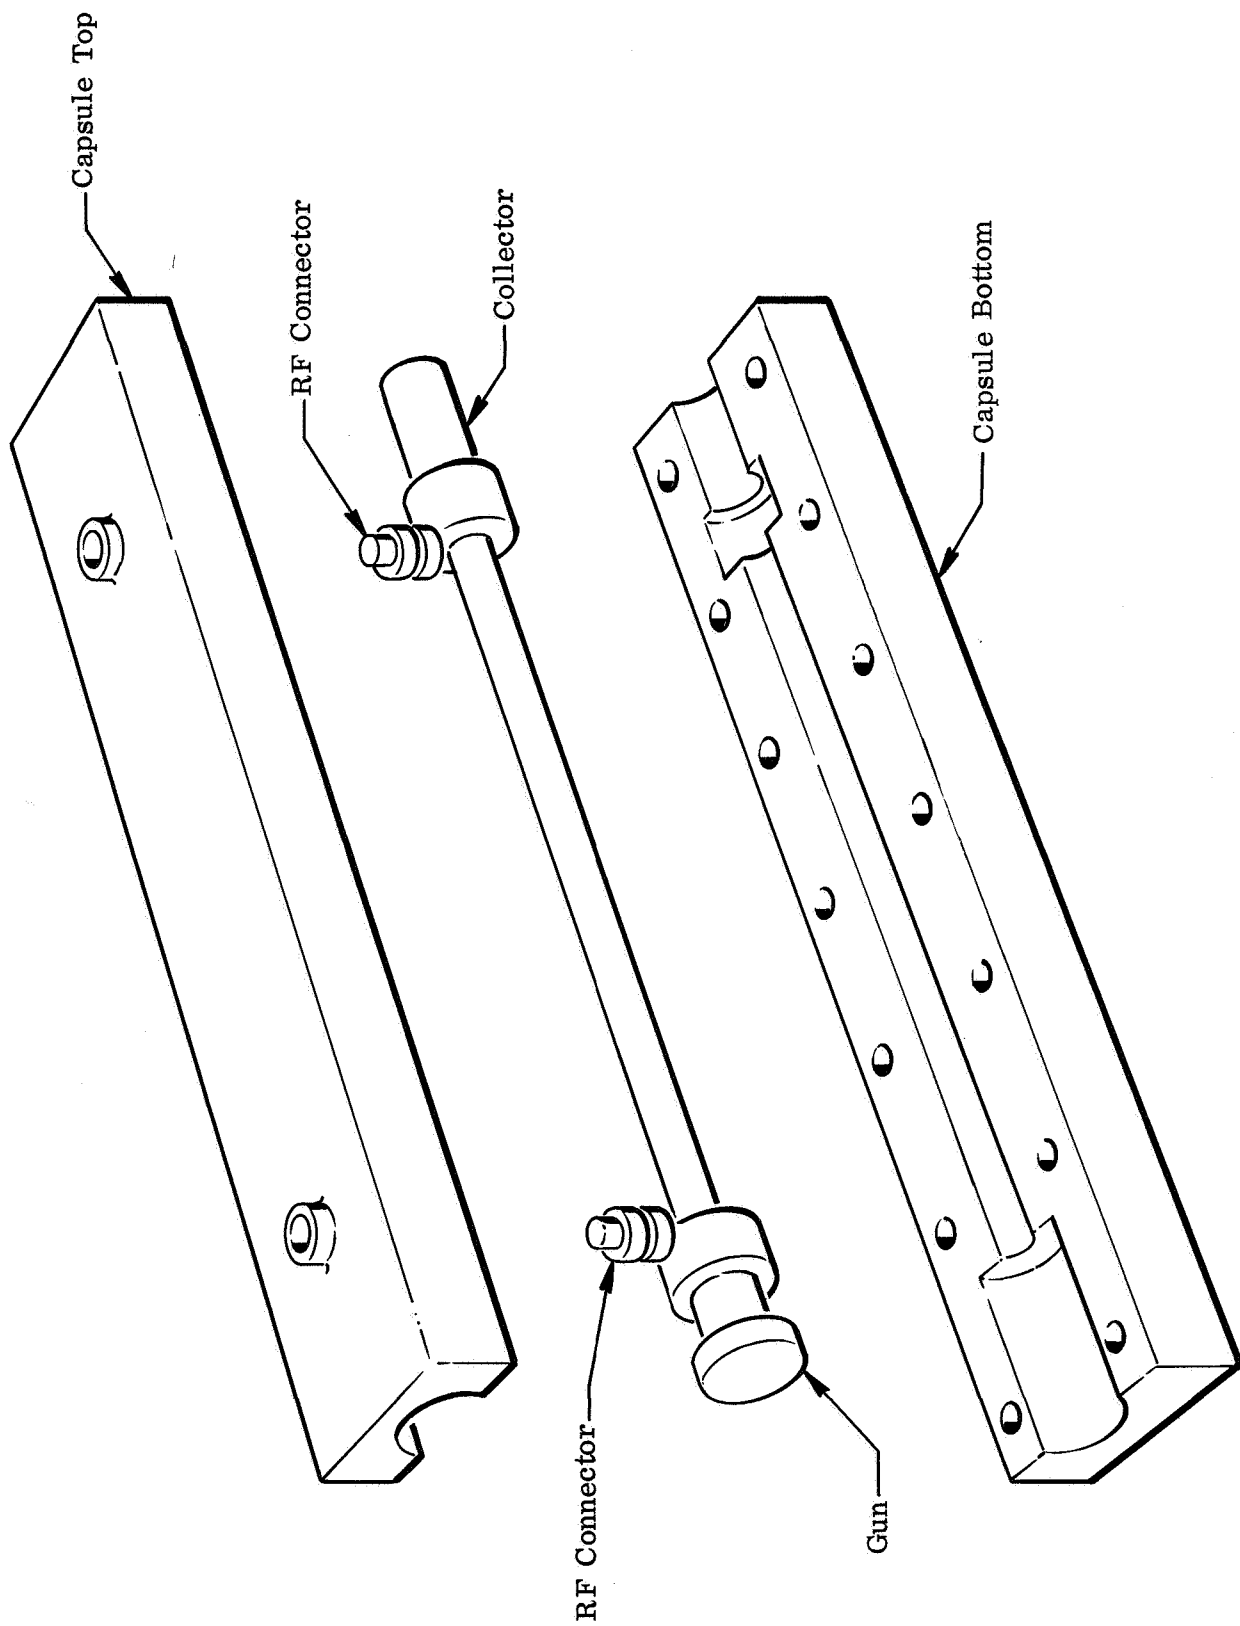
Sketch shows the capsule and tube in an exploded view.
